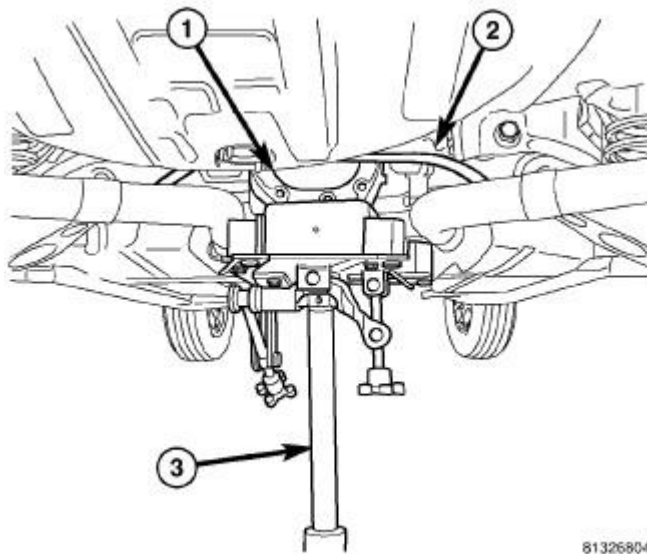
REAR CROSSMEMBER MOUNTING BOLTS
